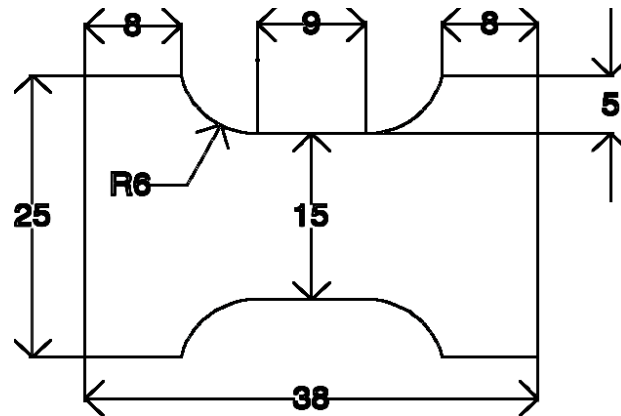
Dimensioned drawing of a PCM tension specimen (all dimensions in mm).
